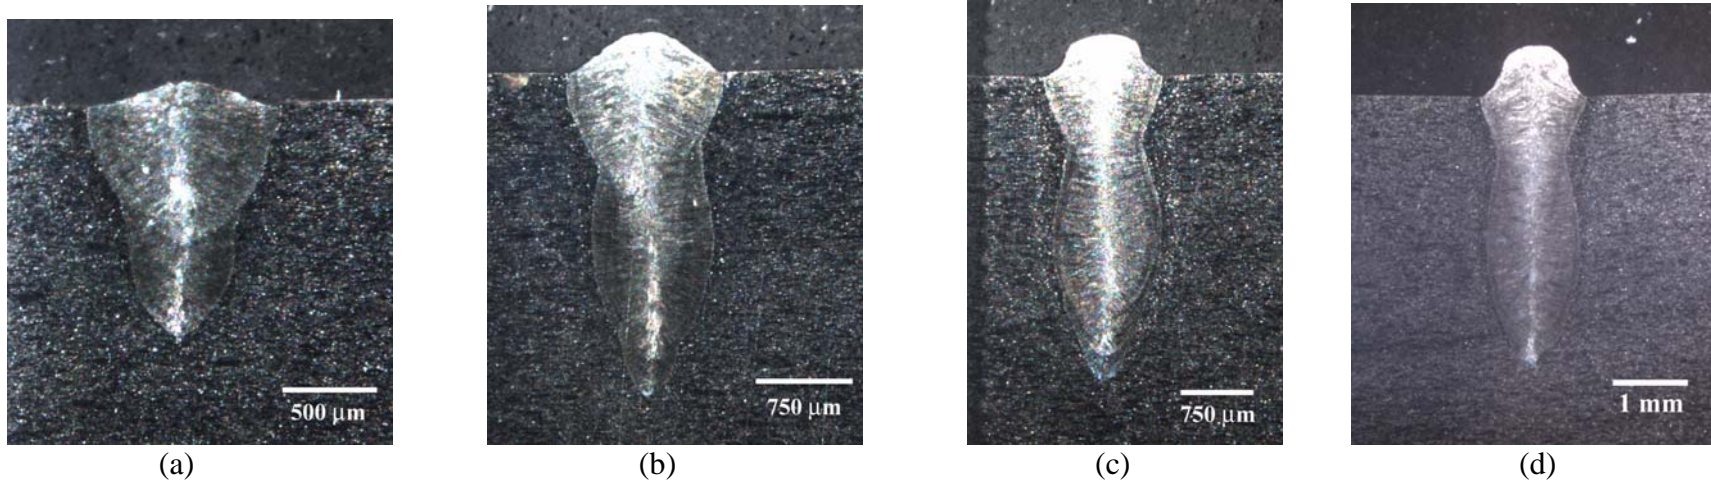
(a-d). Micrographs of weld cross sections in 21-6-9 austenitic stainless steel samples made at machine power settings of (a) 500 W, (b) 1000 W, (c) 1500 W, and (d) 2000 W and a constant travel speed of 19.7 mm/sec using the LLNL welder.
